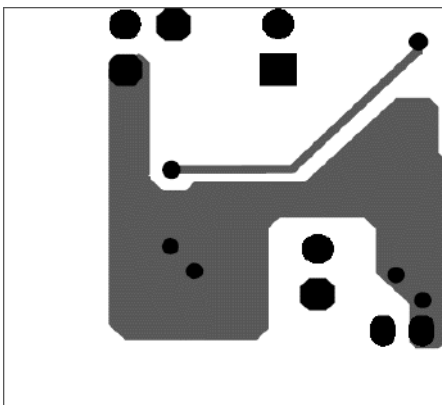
PCB trace Layout of LED Driver models ML-HV-080T40200, ML-HV-100T402300 and ML-HV-120T402750
